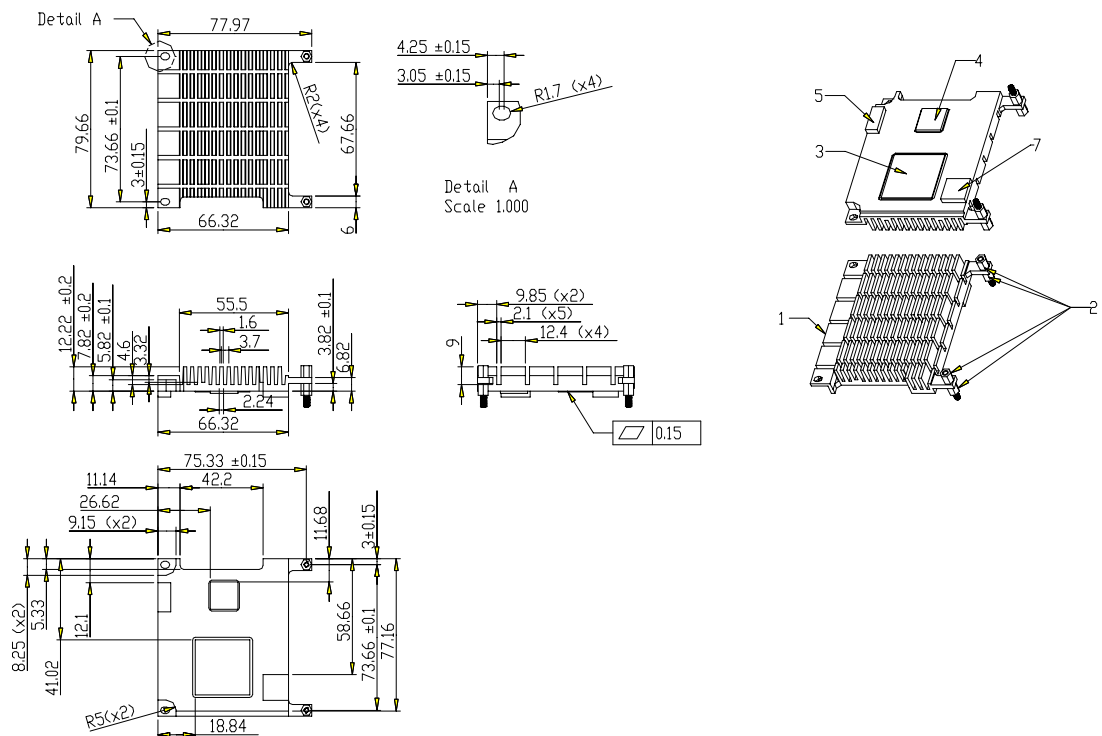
PCM-3362N Heatsink Mechanical Drawing
